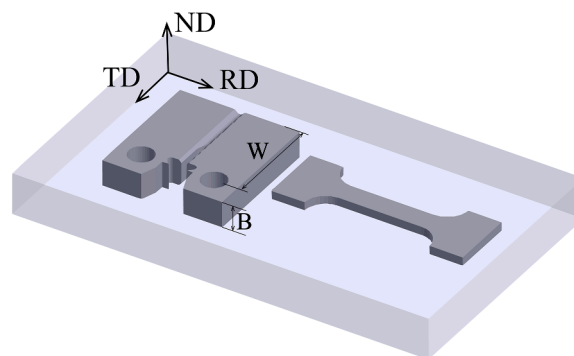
Schematic illustration for preparing the tensile and fracture specimens from the plates.
